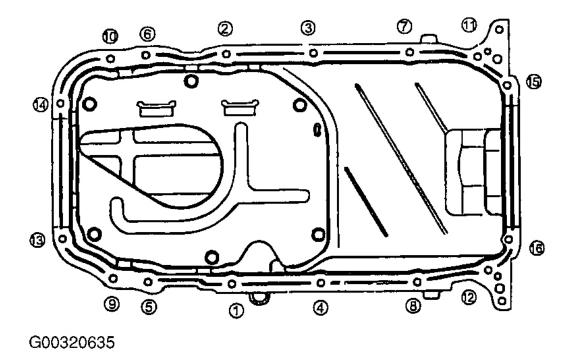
Upper Oil Pan Bolt Tightening Sequence
